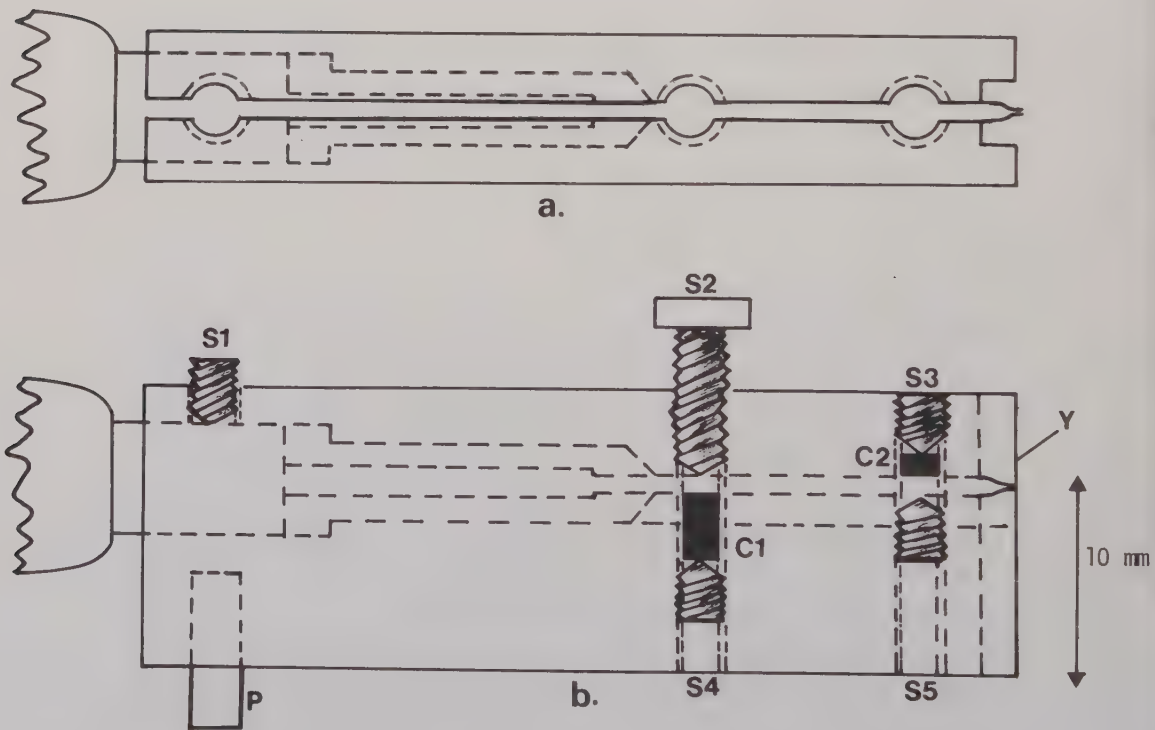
(a.) Top view and (b.) side view of plexiglass fixture.
